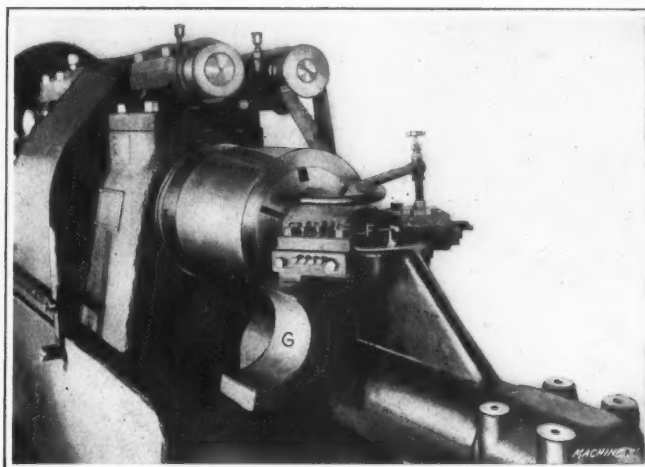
Tools F at work roughing out Nose of Shell Forging
